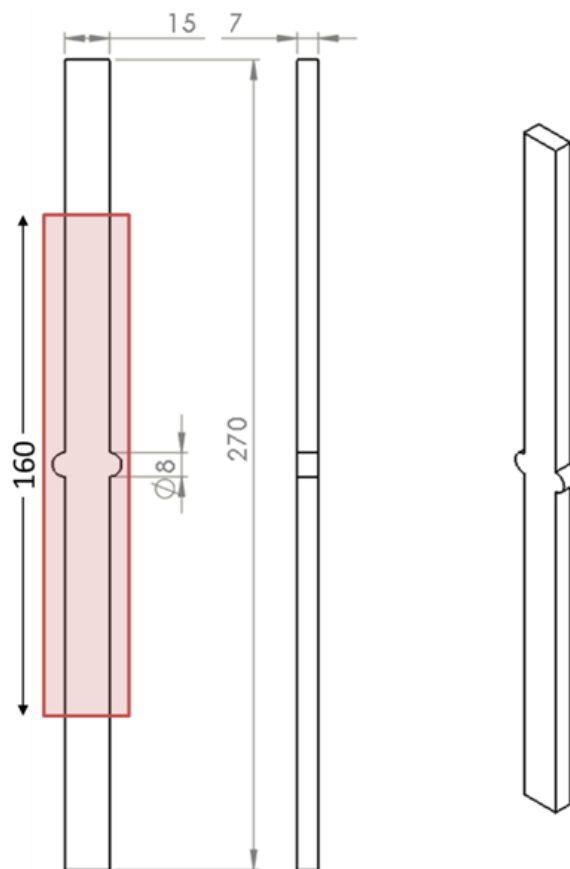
MU-A design drawings with assumed weld bead shape. The red shaded section highlights the initial area recorded with the IR detector for TSA.
